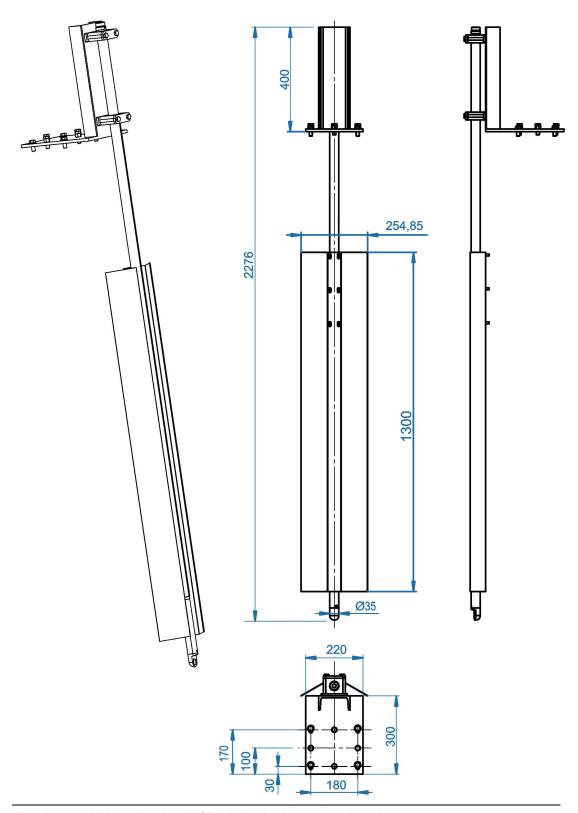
Holder bracket (NOZ00 HAL90) with protective sheet
